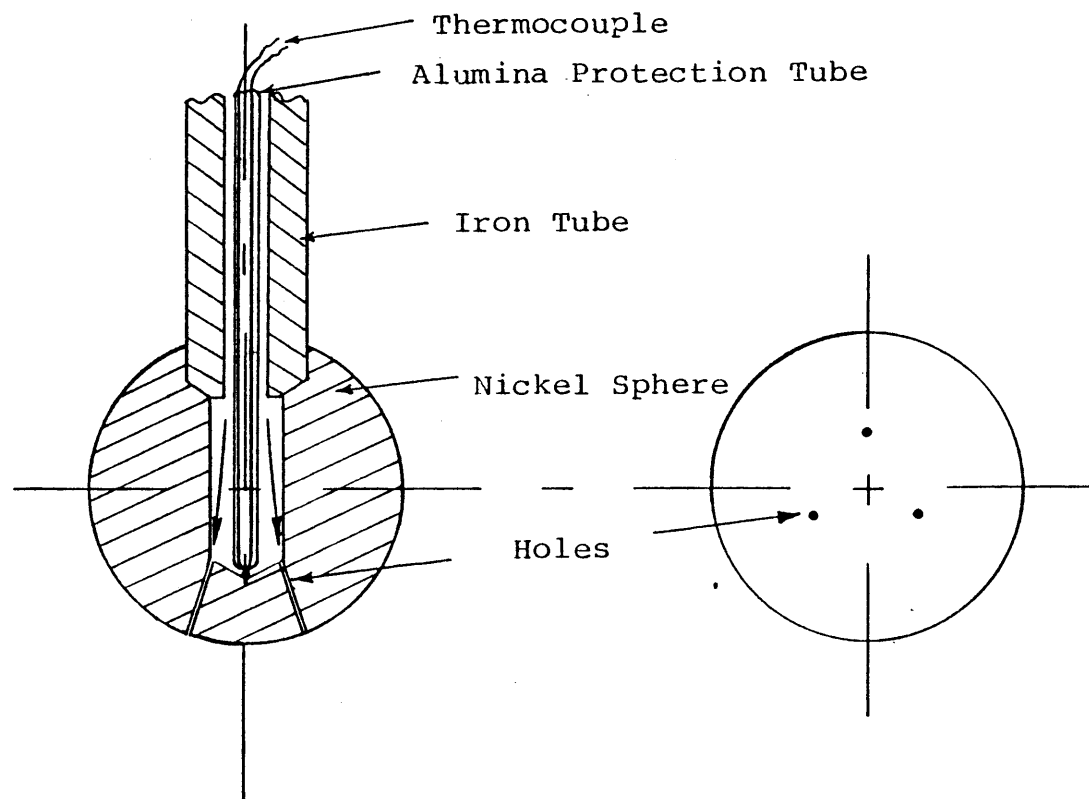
Cast Nickel Sphere (Rad., 15 mm) and Thermocouple Assembly. Diameter of Gas Ports, 0.7 mm.
